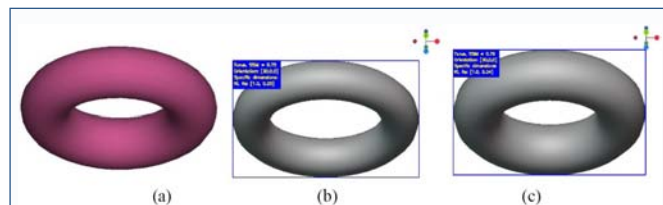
OD and CAD update for a torus part in isometric view, (a) Initial image, (b) CAD detection, (c) CAD-update.
